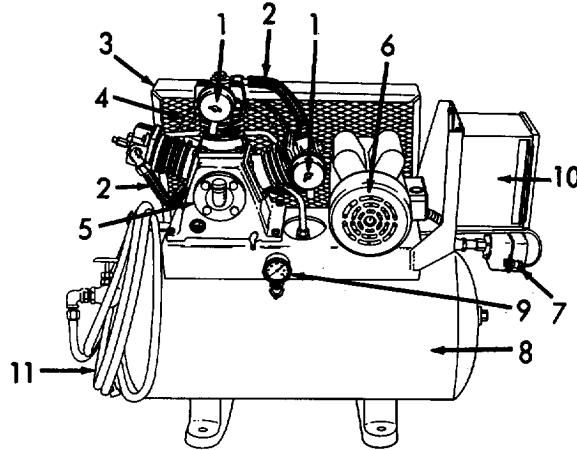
Compressor Unit, Reciprocating, 5 CFM, 175 PSI, Electric Motor Driven.
